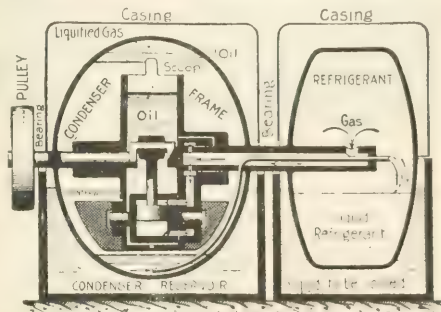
SECTIONAL VIEW OF REFRIGERATING MACHINE
